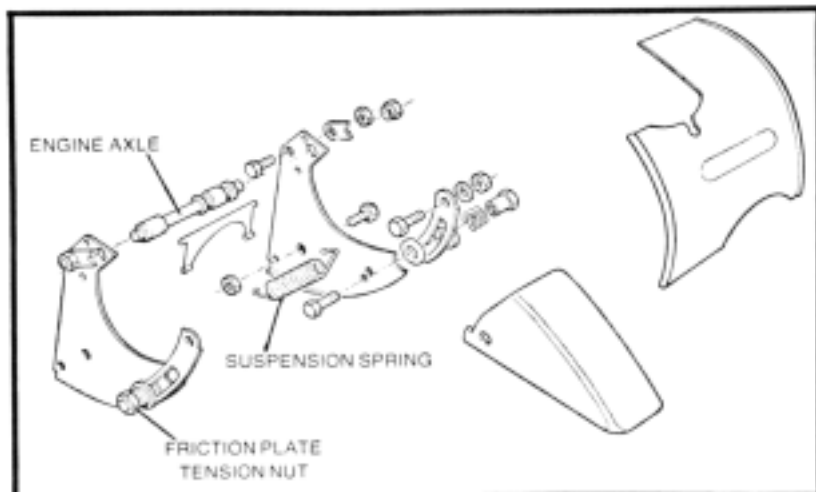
Engine axle, cradle, and spring assembly. Radical simplicity has always been the Velosolex hallmark.
